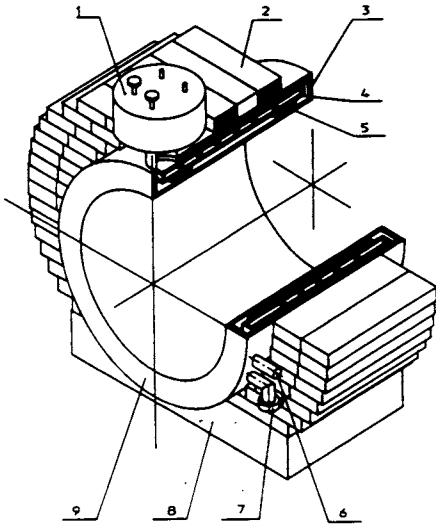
Dipole magnet assembly: 1 — cold box; 2 — iron yoke; 3 — vacuum vessel; 4 — support cylinder; 5 — SC coil; 6 — current leads; 7 — vacuum pumping line; 8 — base; 9 — cryostat
